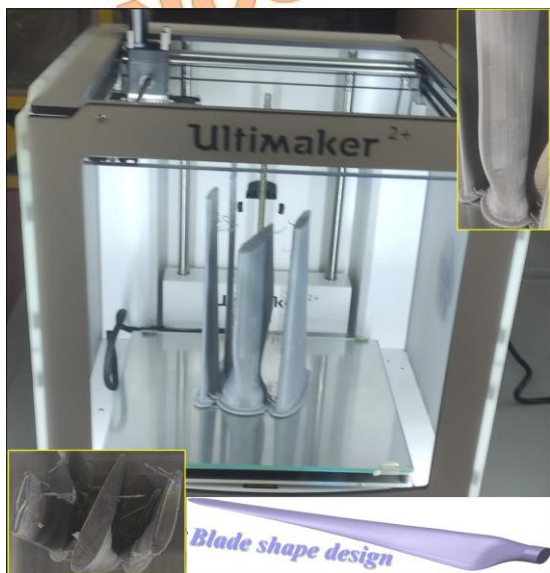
Additive manufacturing setup, Ultimaker employed in the fabrication of the 3D-printed wind turbine blade rib
